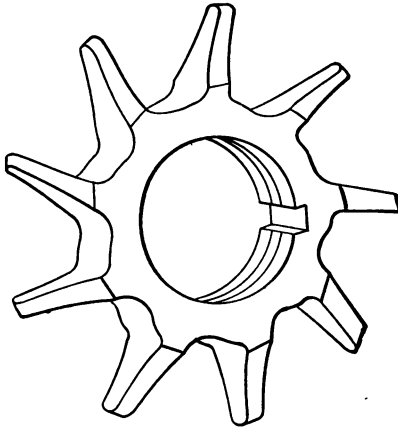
Formed Milling Cutter having been used until but a Small Part of the Tooth remains
